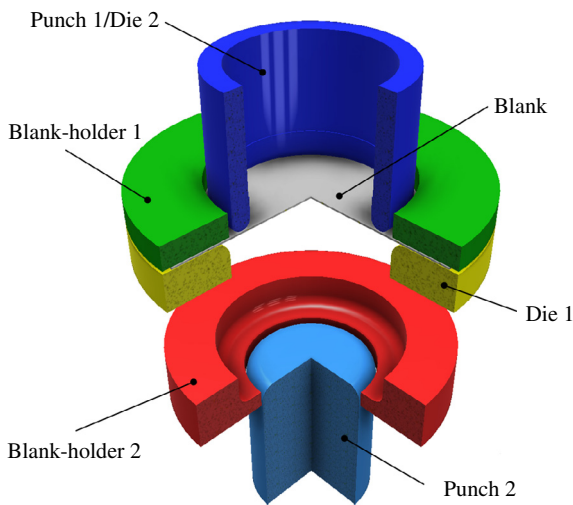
Scheme of the forming tools used in the reverse deep drawing of a cylindrical cup.
